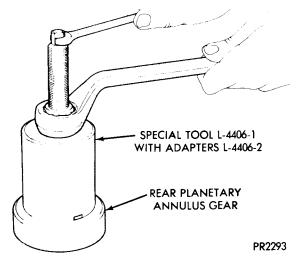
Remove Rear Planetary Annulus Gear Bearing Cone
